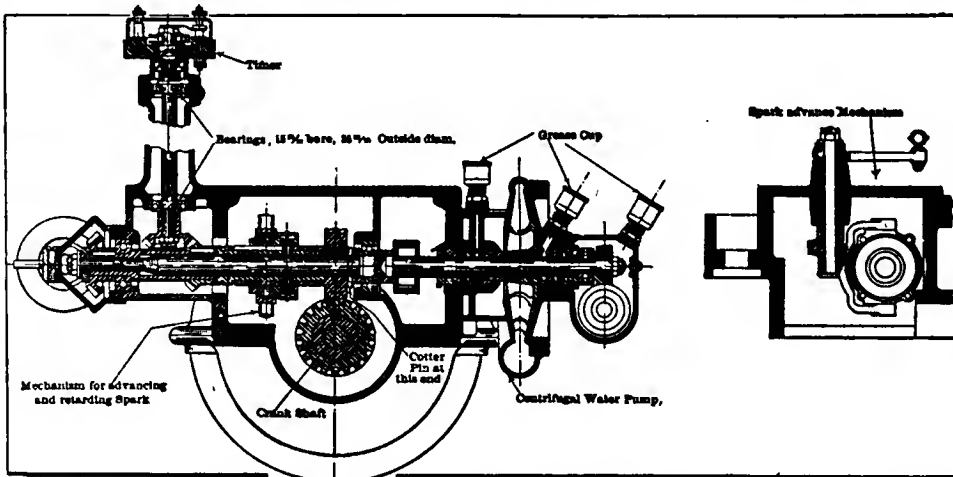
Section of crankcase at lateral shaft, depicting water pump in section, drive for magneto and method of advancing the spark
